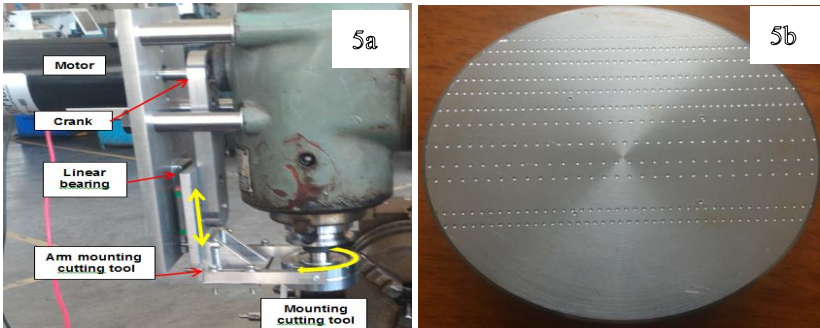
Dynamic Assisted Tooling; (a) attachment on machine and (b) dimple structure produced with DATM on milling machine
